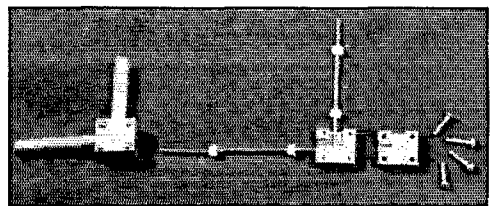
LEFT—A COMPLETED RIGHT-ANGLE COAXIAL JOINT RIGHT—THE JOINT READY TO BE ASSEMBLED
